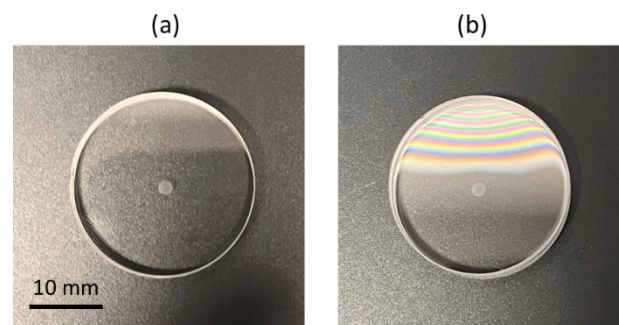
Assembly of two fused silica samples with a diameter of 1 inch and a thickness of 3 mm after welding with (a) no airgap and (b) a $2 \mu\text{m}$ airgap.
